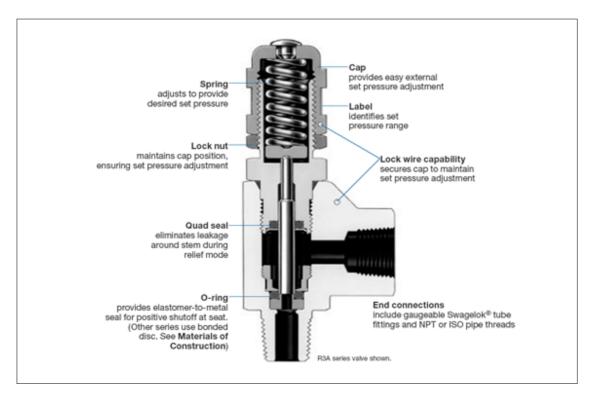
Sectional view of the PRV used in the GDI system of the prototype engine [13]
